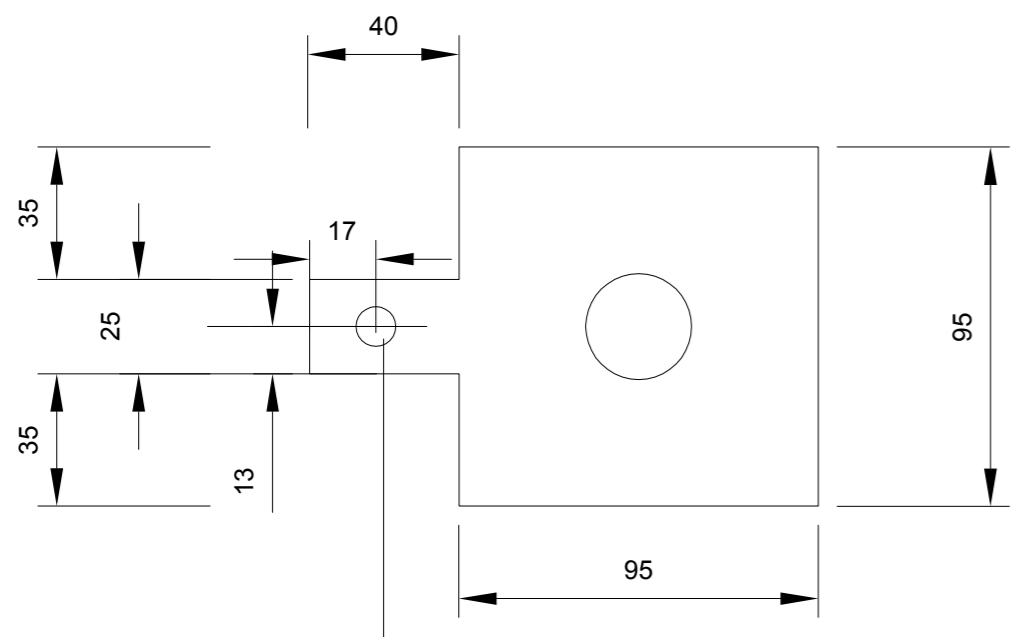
DETAIL "B" CABLE TO EARTH ROD CONNECTION
